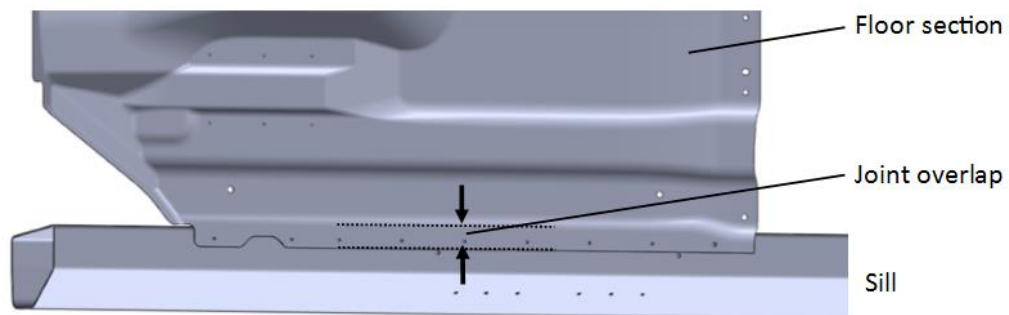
CFRP Floor / sill demonstrator component shown assembled
